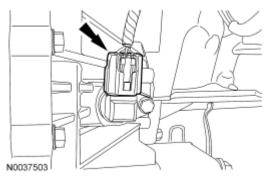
Locating Turbine Shaft Speed (TSS) Sensor Electrical Connector Courtesy of FORD MOTOR CO.
